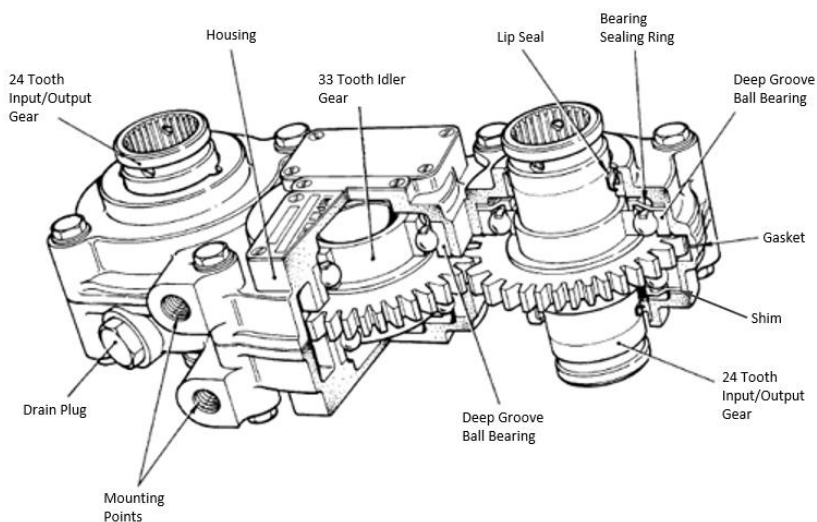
Section View of High-Lift Transmission Spur Gearbox
